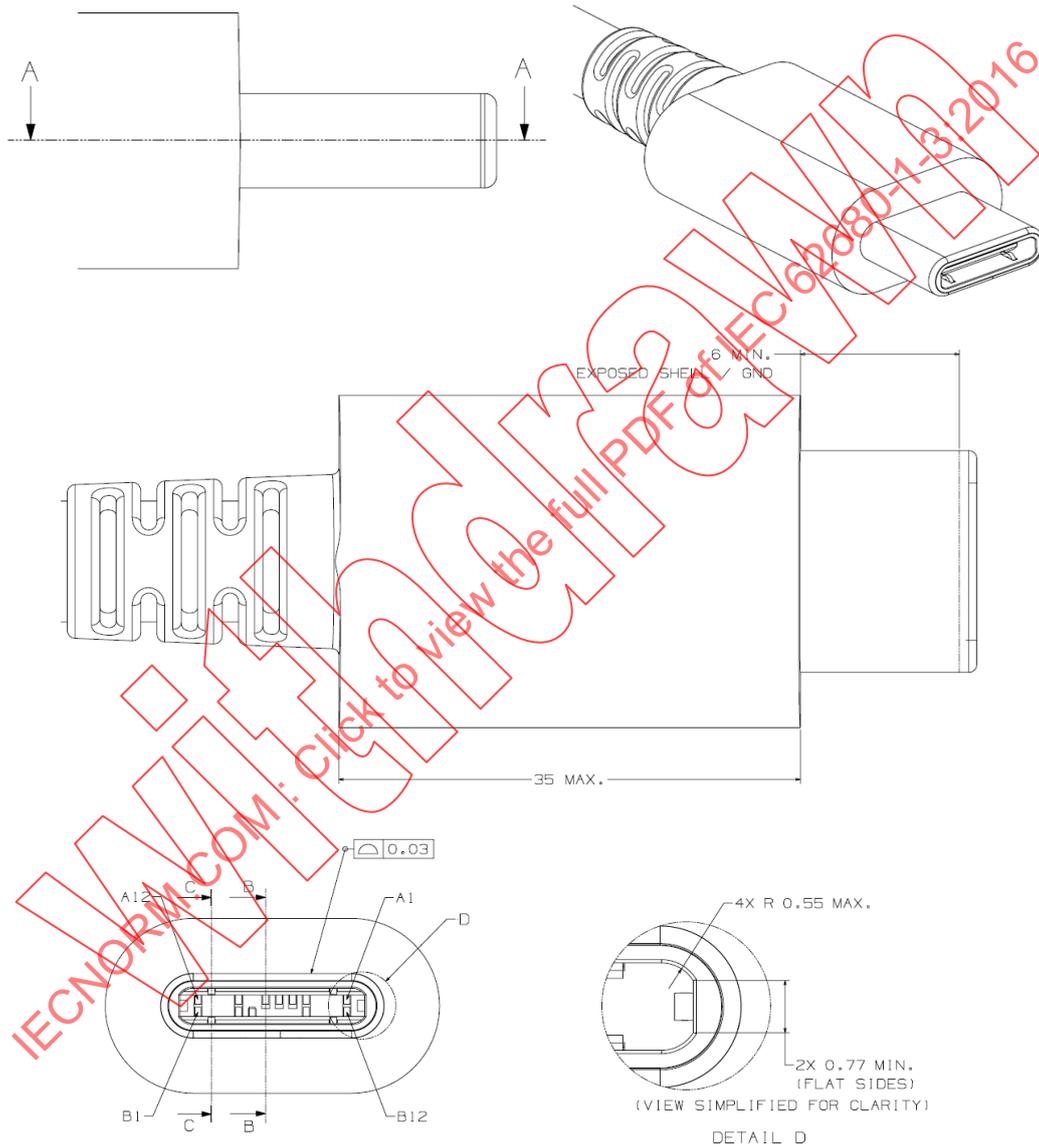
USB 2.0 Type-C Plug Interface Dimensions
